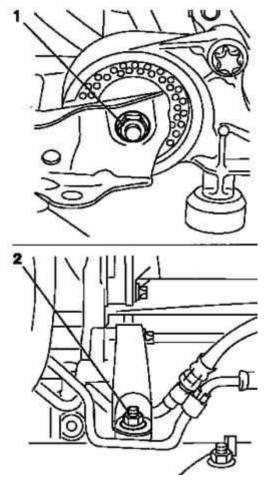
Removing the front and rear damping engine blocks: 1, 2 - bolts fixing
